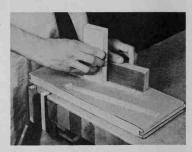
Using a sanding board and a straightedge to square a small piece.
